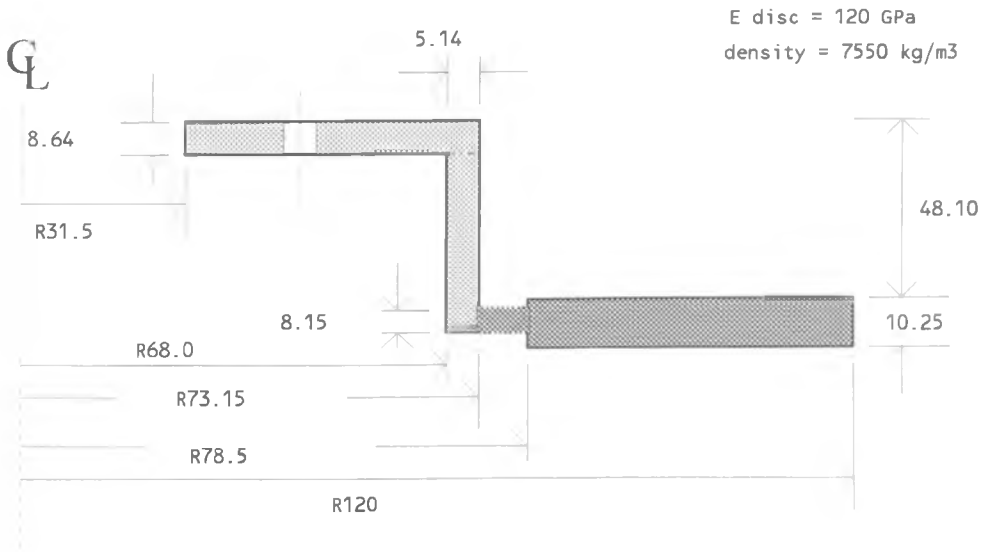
The cross-section dimension of disc (all dimensions in mm)
